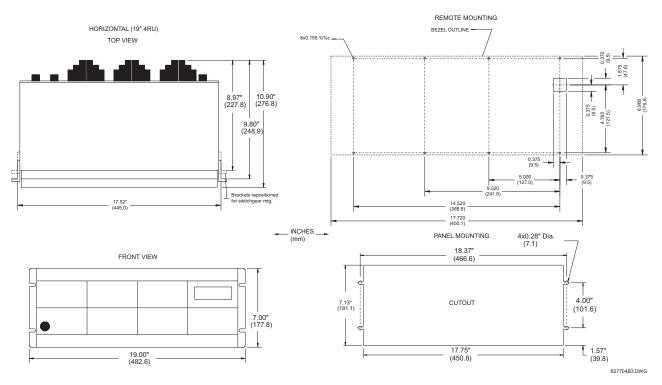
UR HORIZONTAL MOUNTING AND DIMENSIONS
